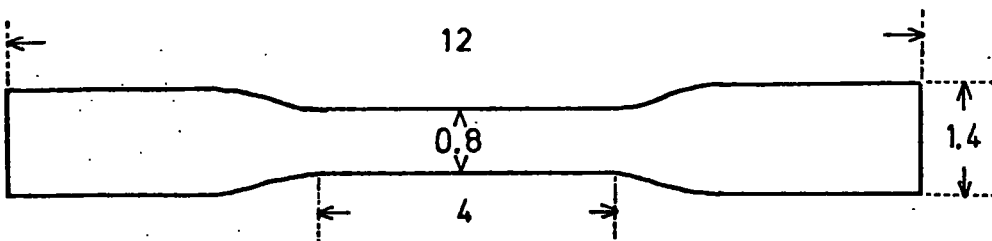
Tensile test piece dimensions (figures in cm ).
